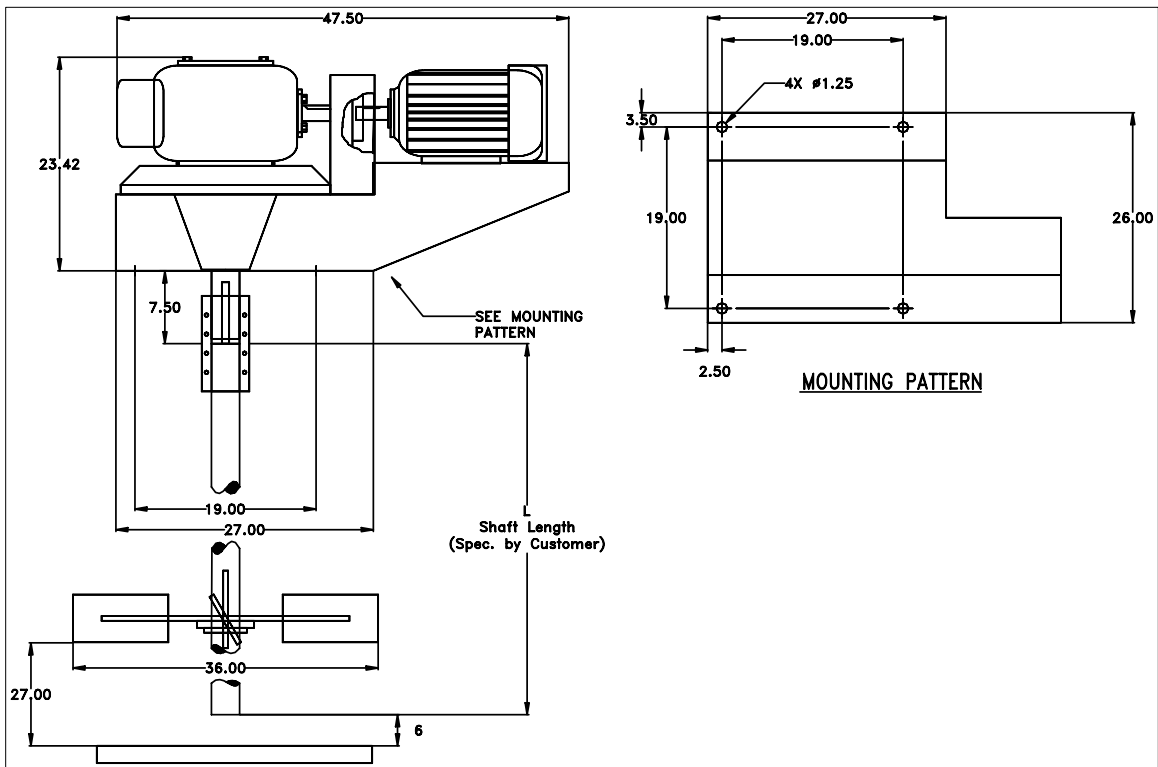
DIMENSIONAL DRAWING MA-10
